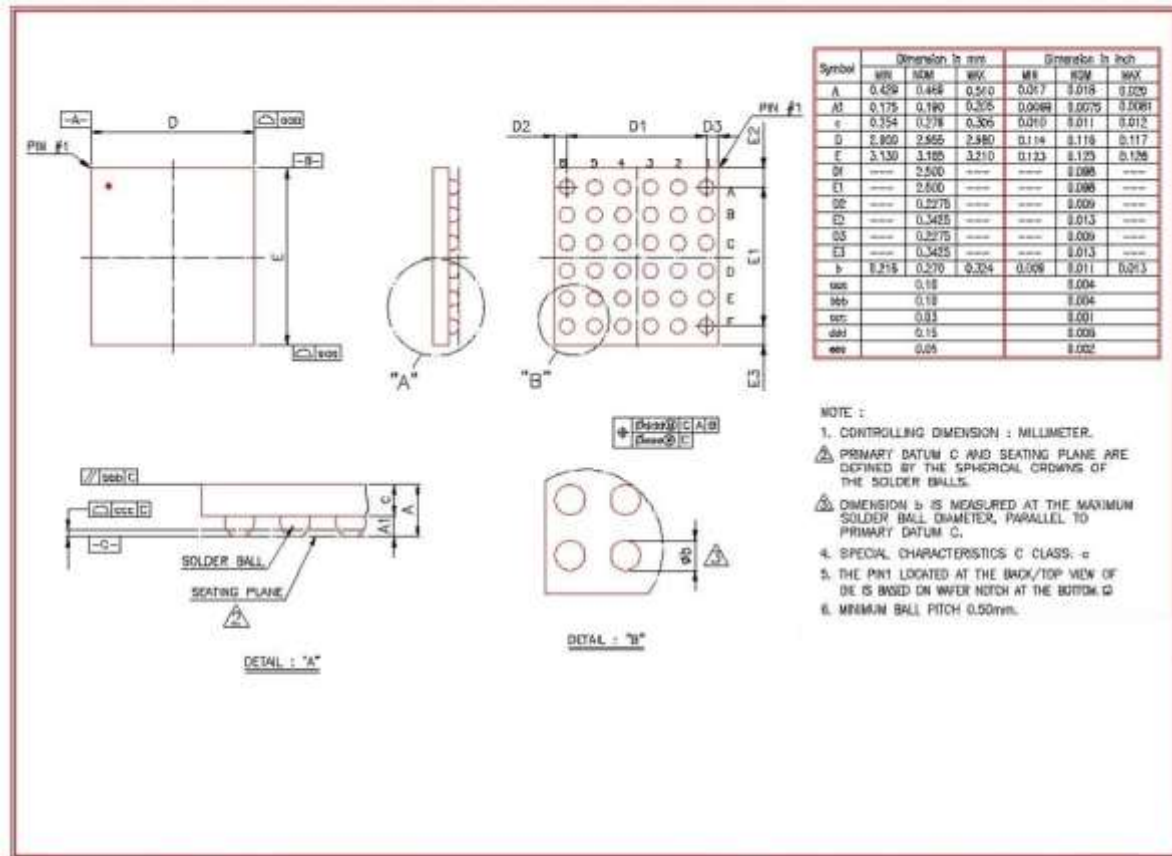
36 Bump WL-CSP 0.5 mm Pitch Package Outline Drawing
